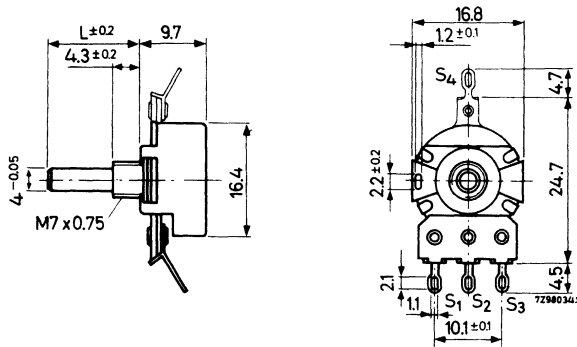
Potentiometers 2322 380 with soldering tags; plain spindle
